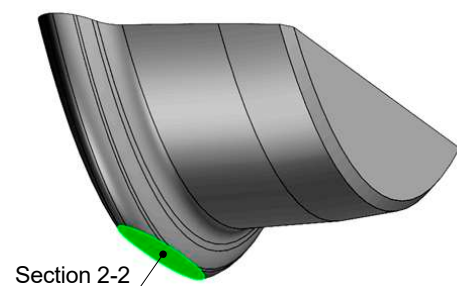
Example of constructing a 2-2 cross section to determine the geometric parameters of a flange
